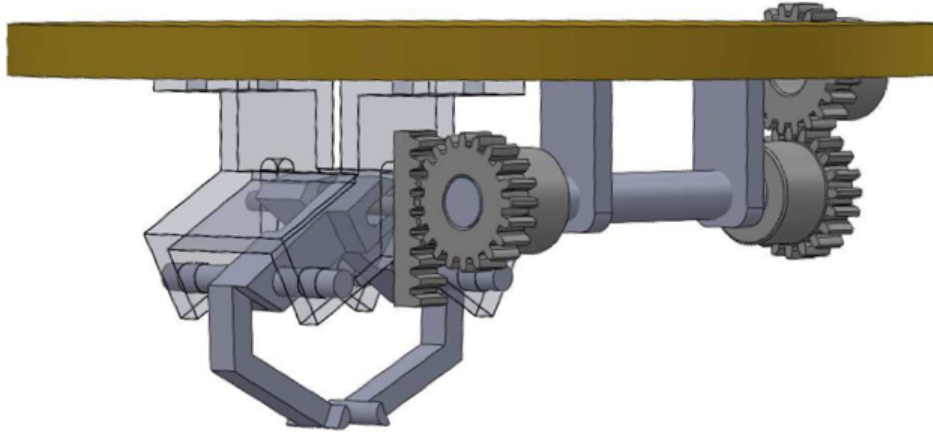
First prototype of a clamping mechanism that will attach onto the cold plate. Rotary feedthrough and silicon sample are not pictured.
